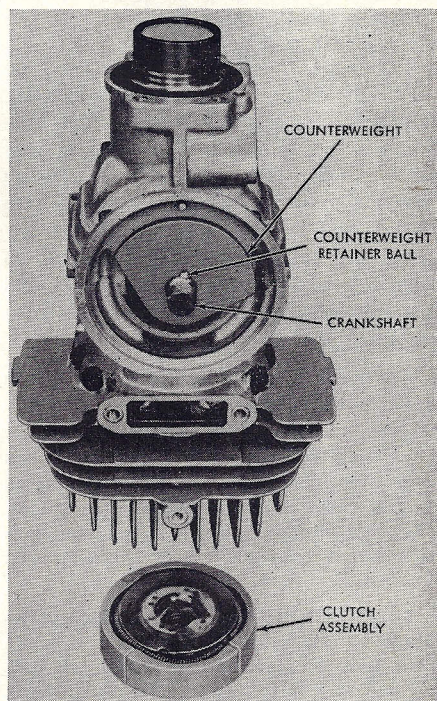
Clutch assembly removed from BP-1 engine showing position of counterweight and counterweight retaining ball on engine crankshaft.
